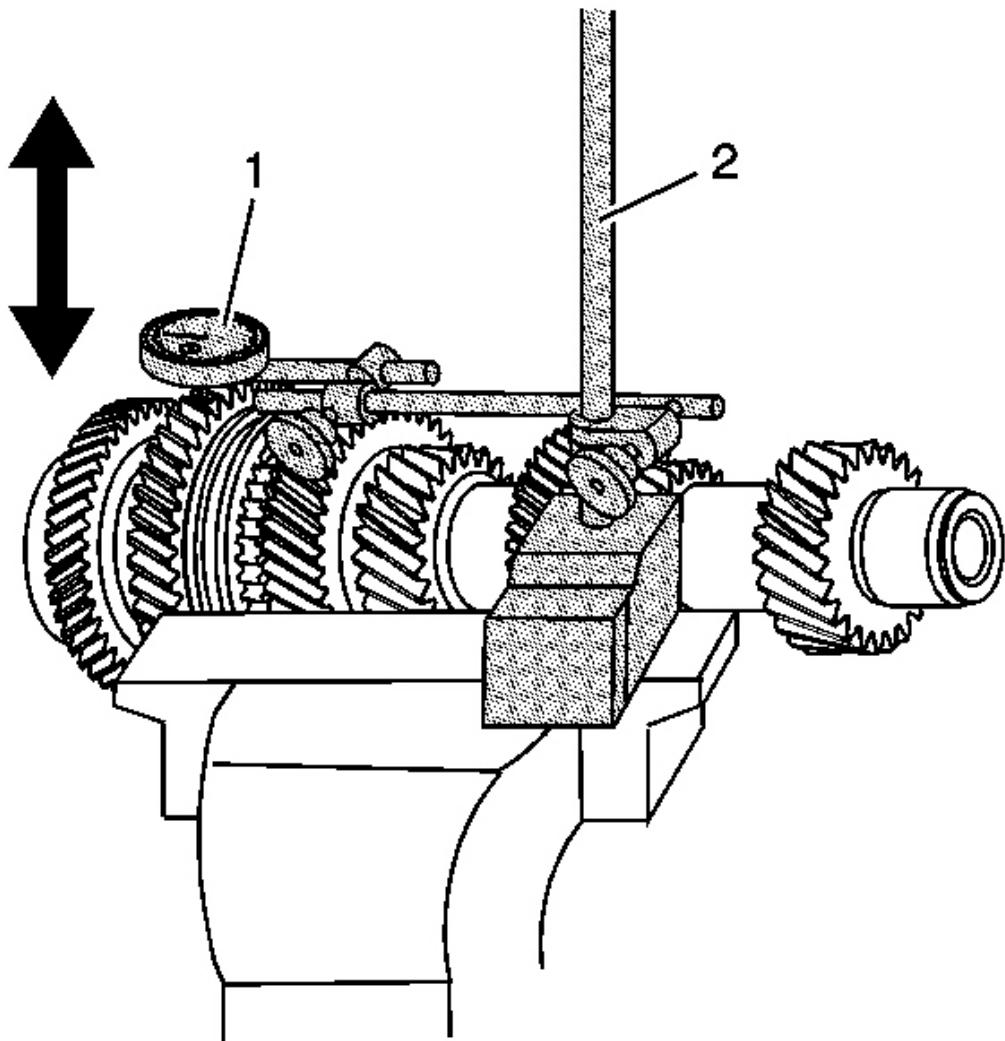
Measuring Radial Clearance For 5th Countershaft Gear
